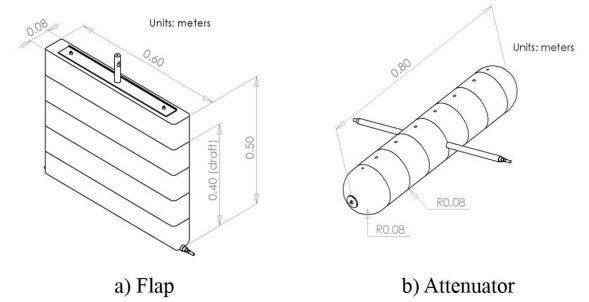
Shown are drawings of each geometry model assembly indicating dimensions in meters.
